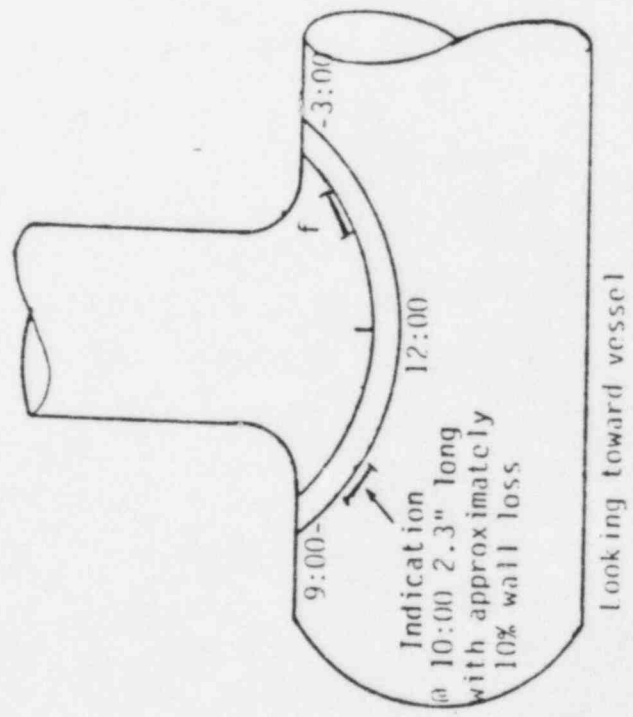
Flaw Indications in Weld KR-2-14
